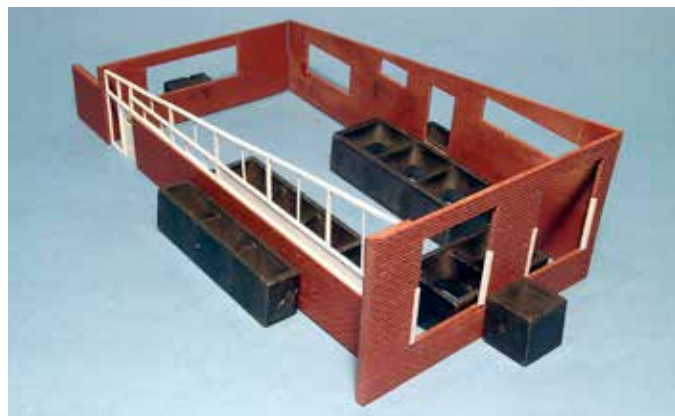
Wall assembly. The front corner is a T joint, but the other three have filed 45-degree bevels as shown in fig. 1. Steel blocks held these joints square while the glue set.
